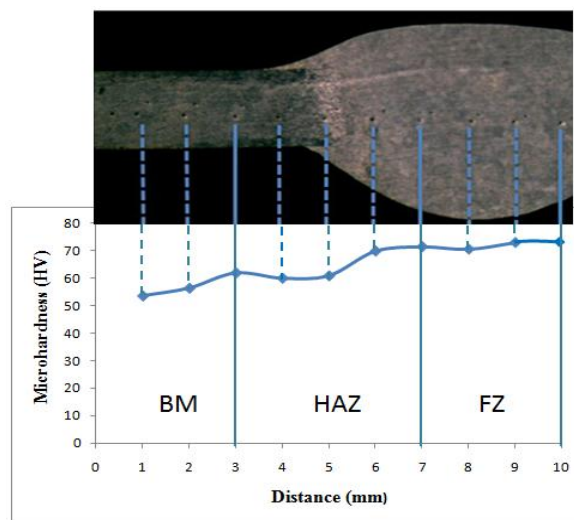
Hardness value of weld joint AA6061-AA6061 using filler ER5356
